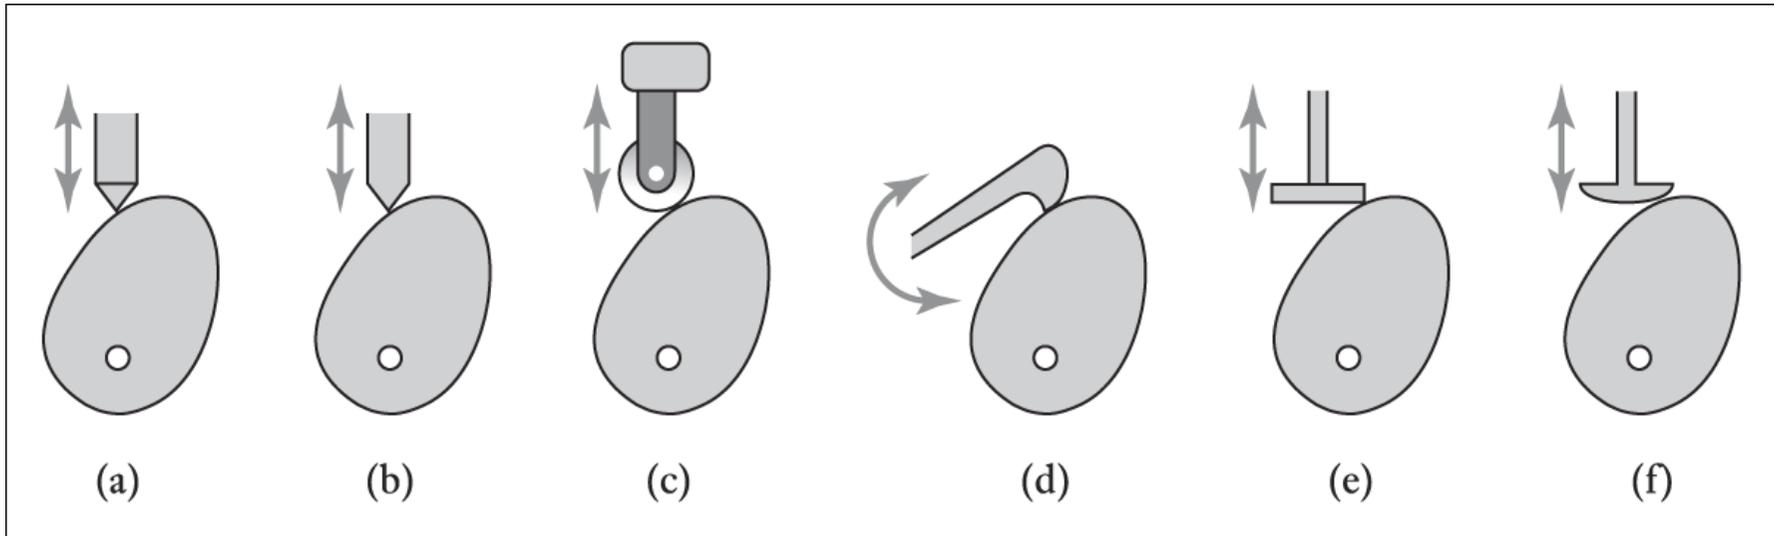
Cam followers: (a) point, (b) knife, (c) roller, (d) sliding and oscillating, (e) flat, (f) mushroom
